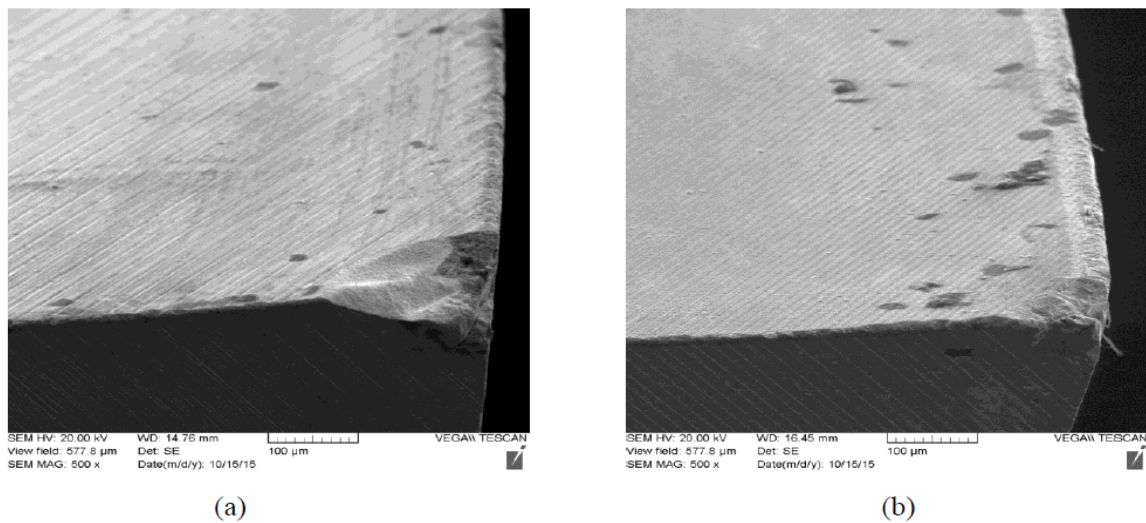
SEM image of one tooth of the worn four flute end mill tool after 50 m cut: (a) Uncoated (b) TiB₂-LHC coated
